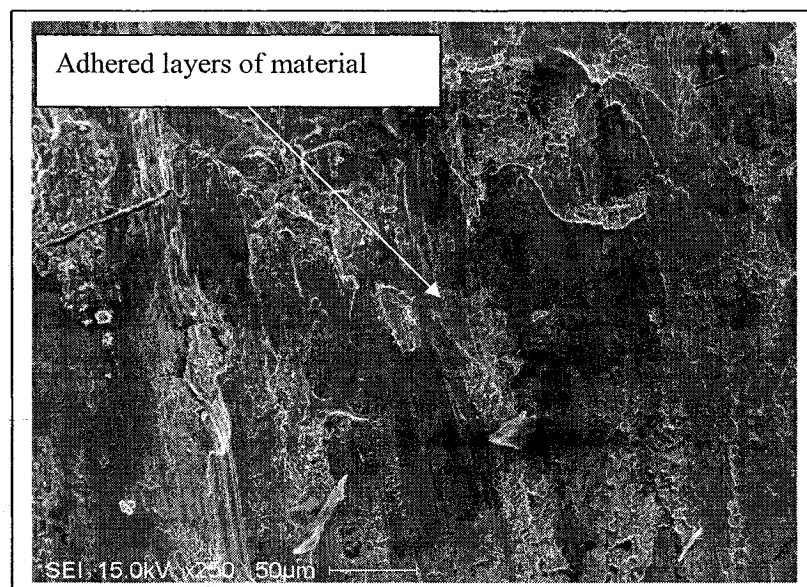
Microstructure of wear surface (Whisker ceramic tool, cutting speed = 1250 m/min, feed = 0.12 mm/tooth)
